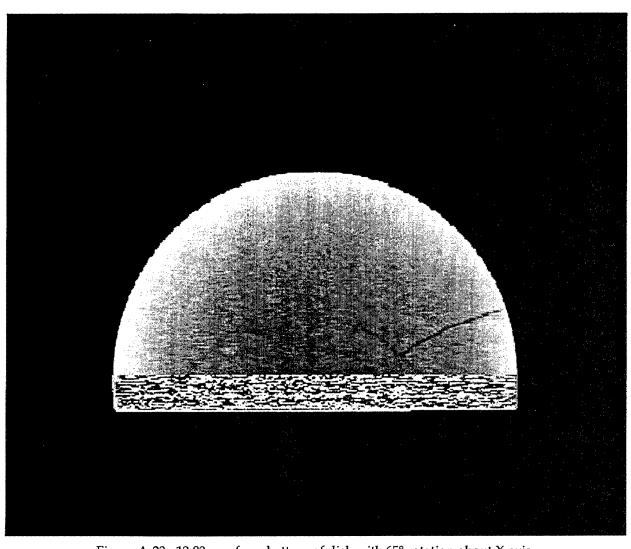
13.83 mm from bottom of disk with 65° rotation about X-axis.
